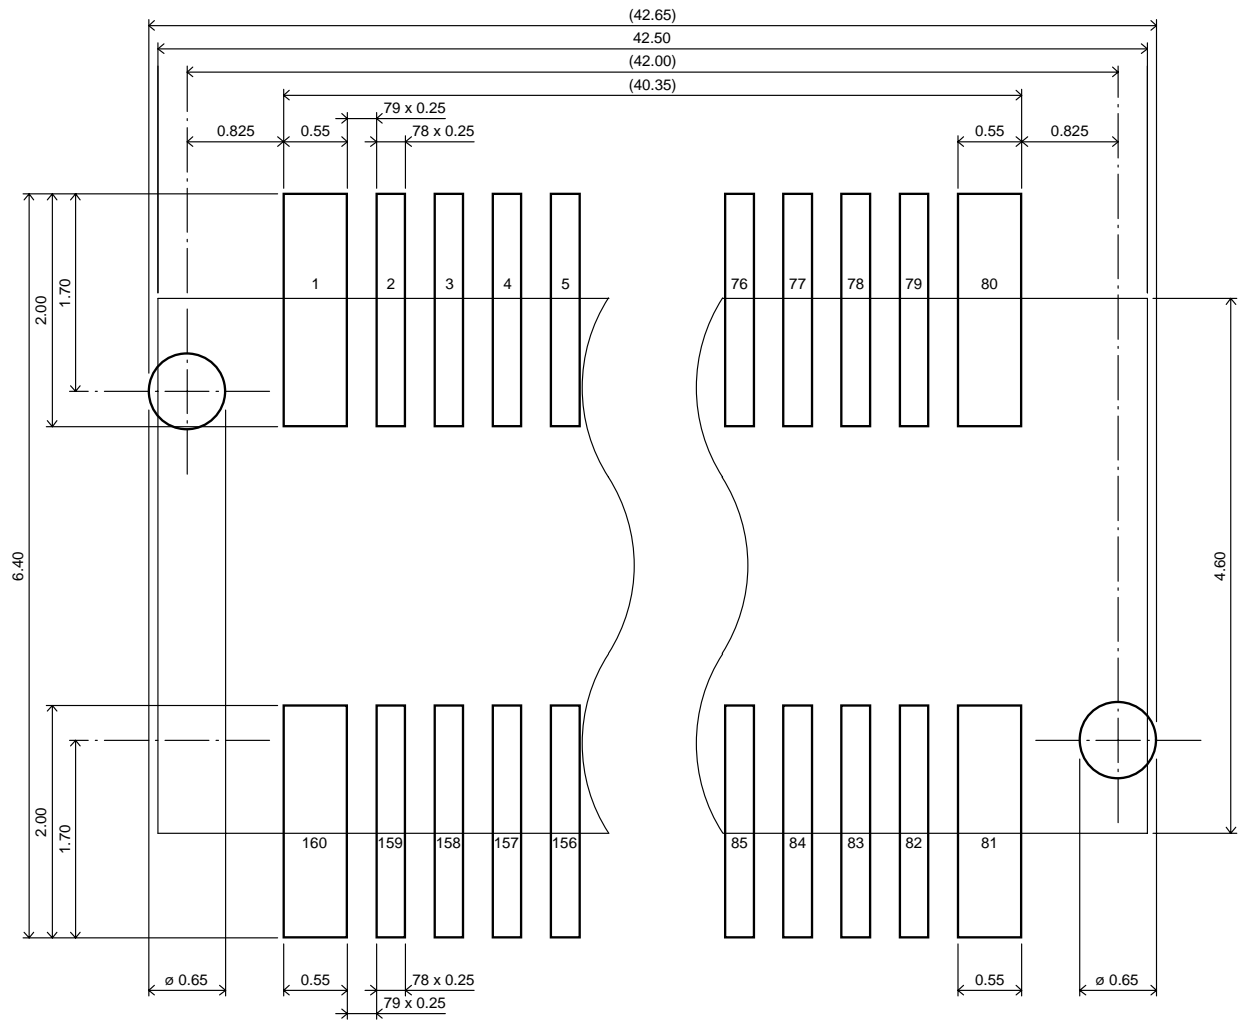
Pad layout specifications for the daughter-card connector (all dimensions are in millimeters).
